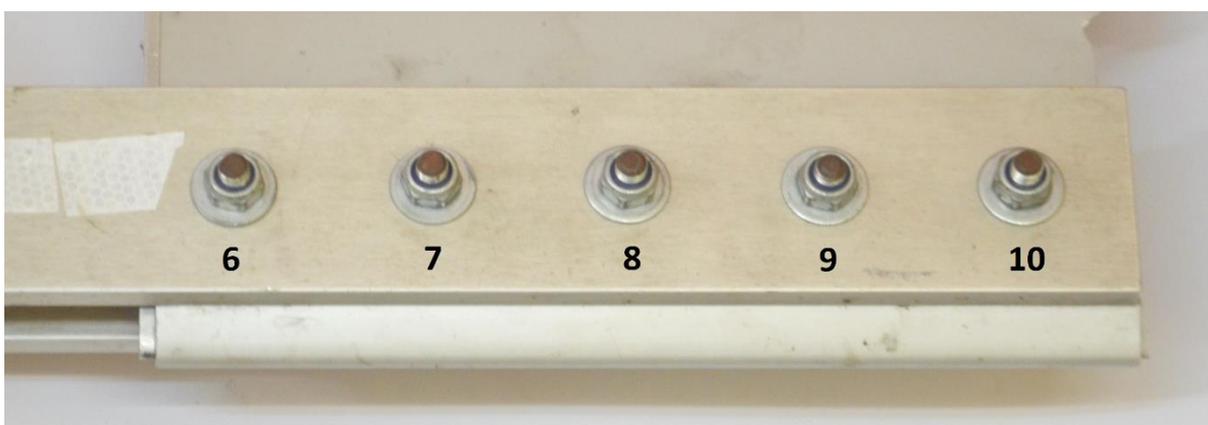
Markings of the bolts of blade that broke due to destruction of the first blade [source: Silesian University of Technology]
